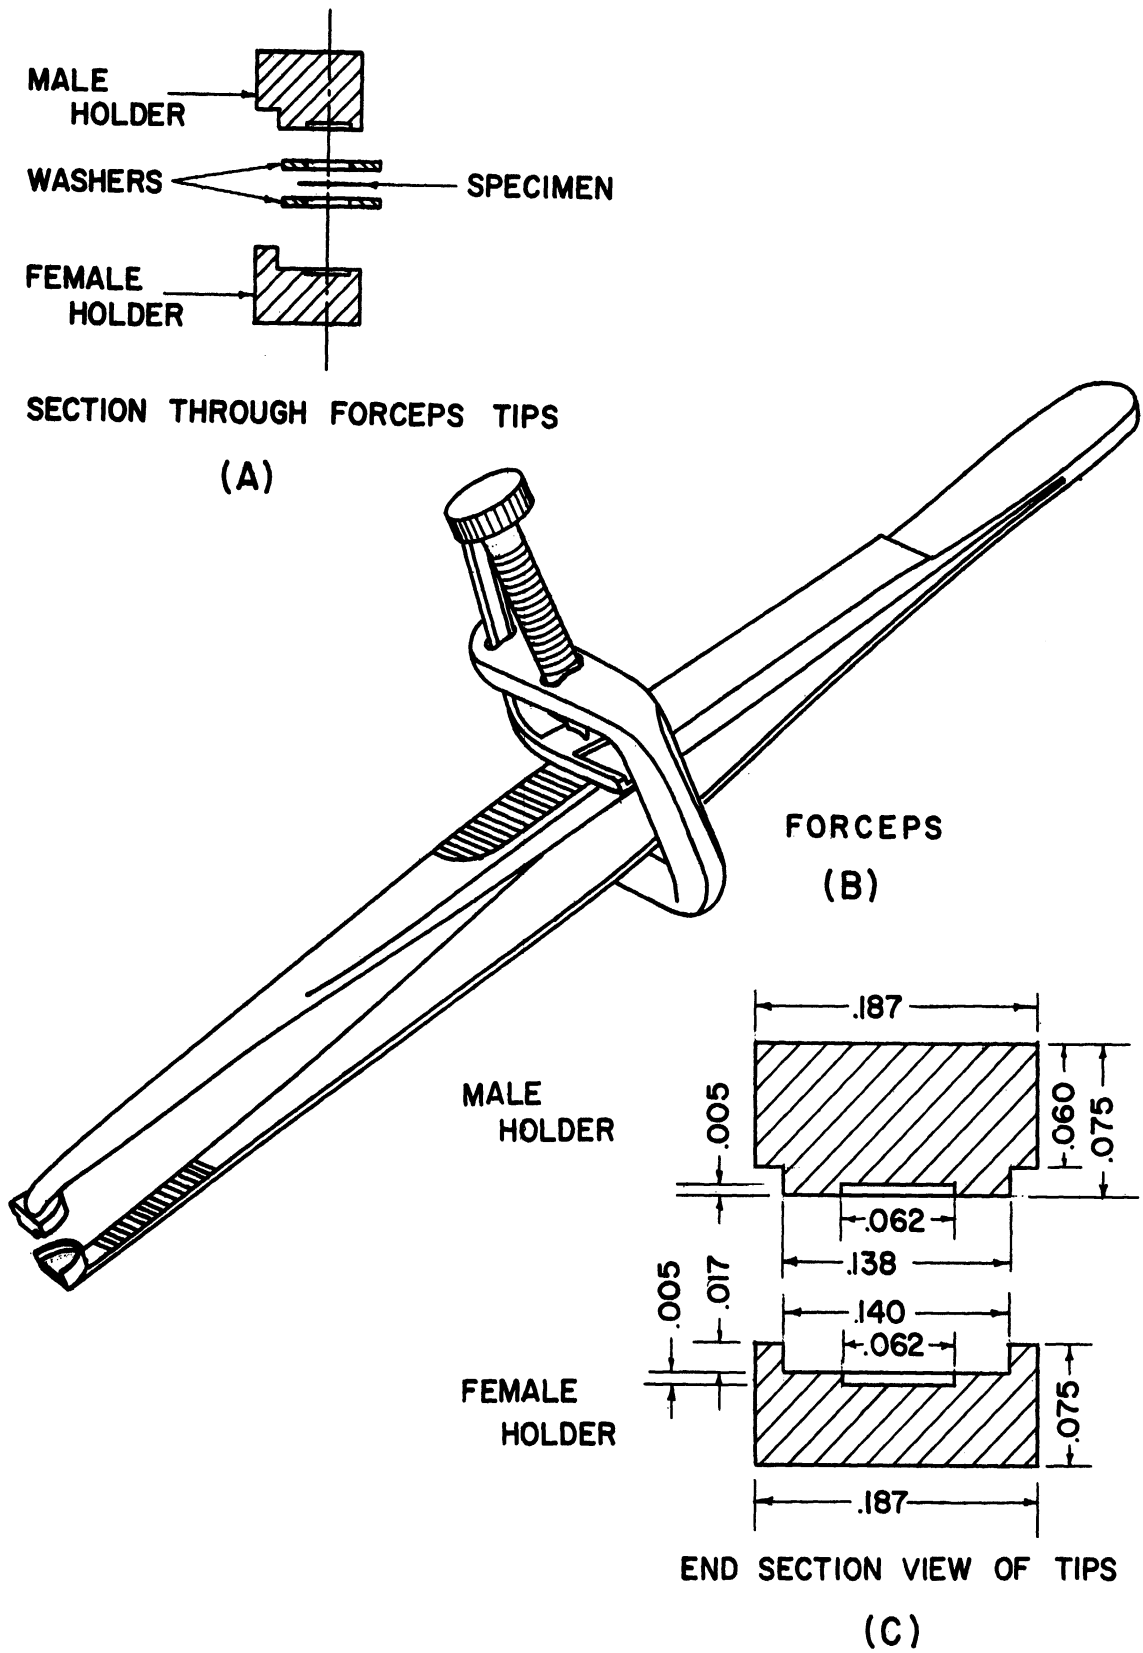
Forceps Employed for Holding the Specimen Assembly During Spotwelding.
